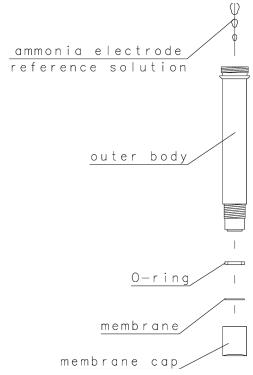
I9121 Ammonia Combination ISE outer body assembly
